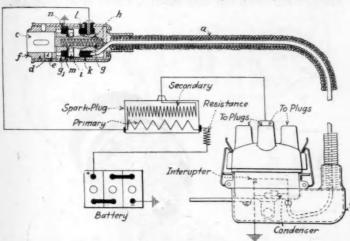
Entire Mechanism of the Ignition Lock in the Locked Position
